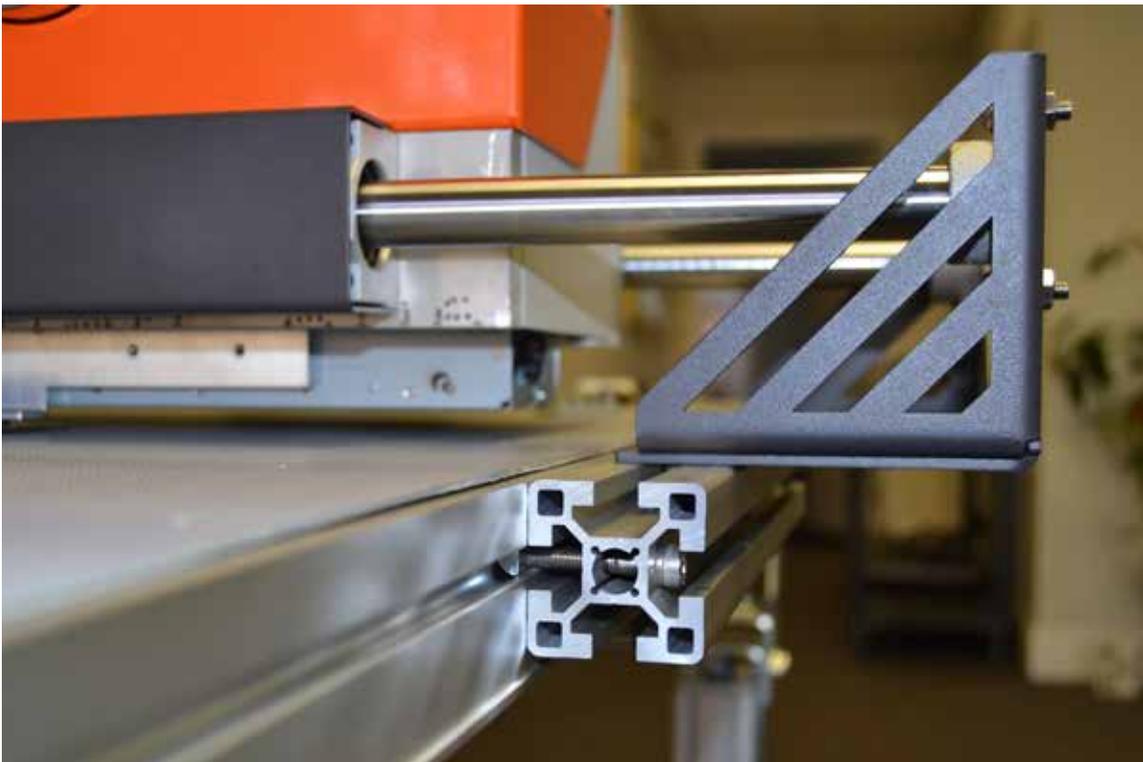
Printer mounting bracket rests on the mounted 40x40mm extrusion.
